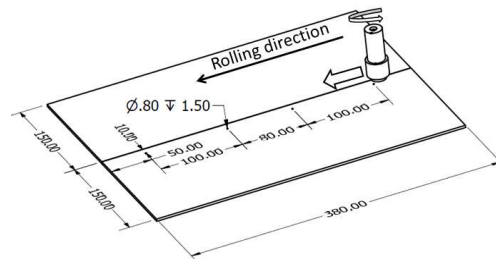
Welding test configuration and thermocouple location during welding.
